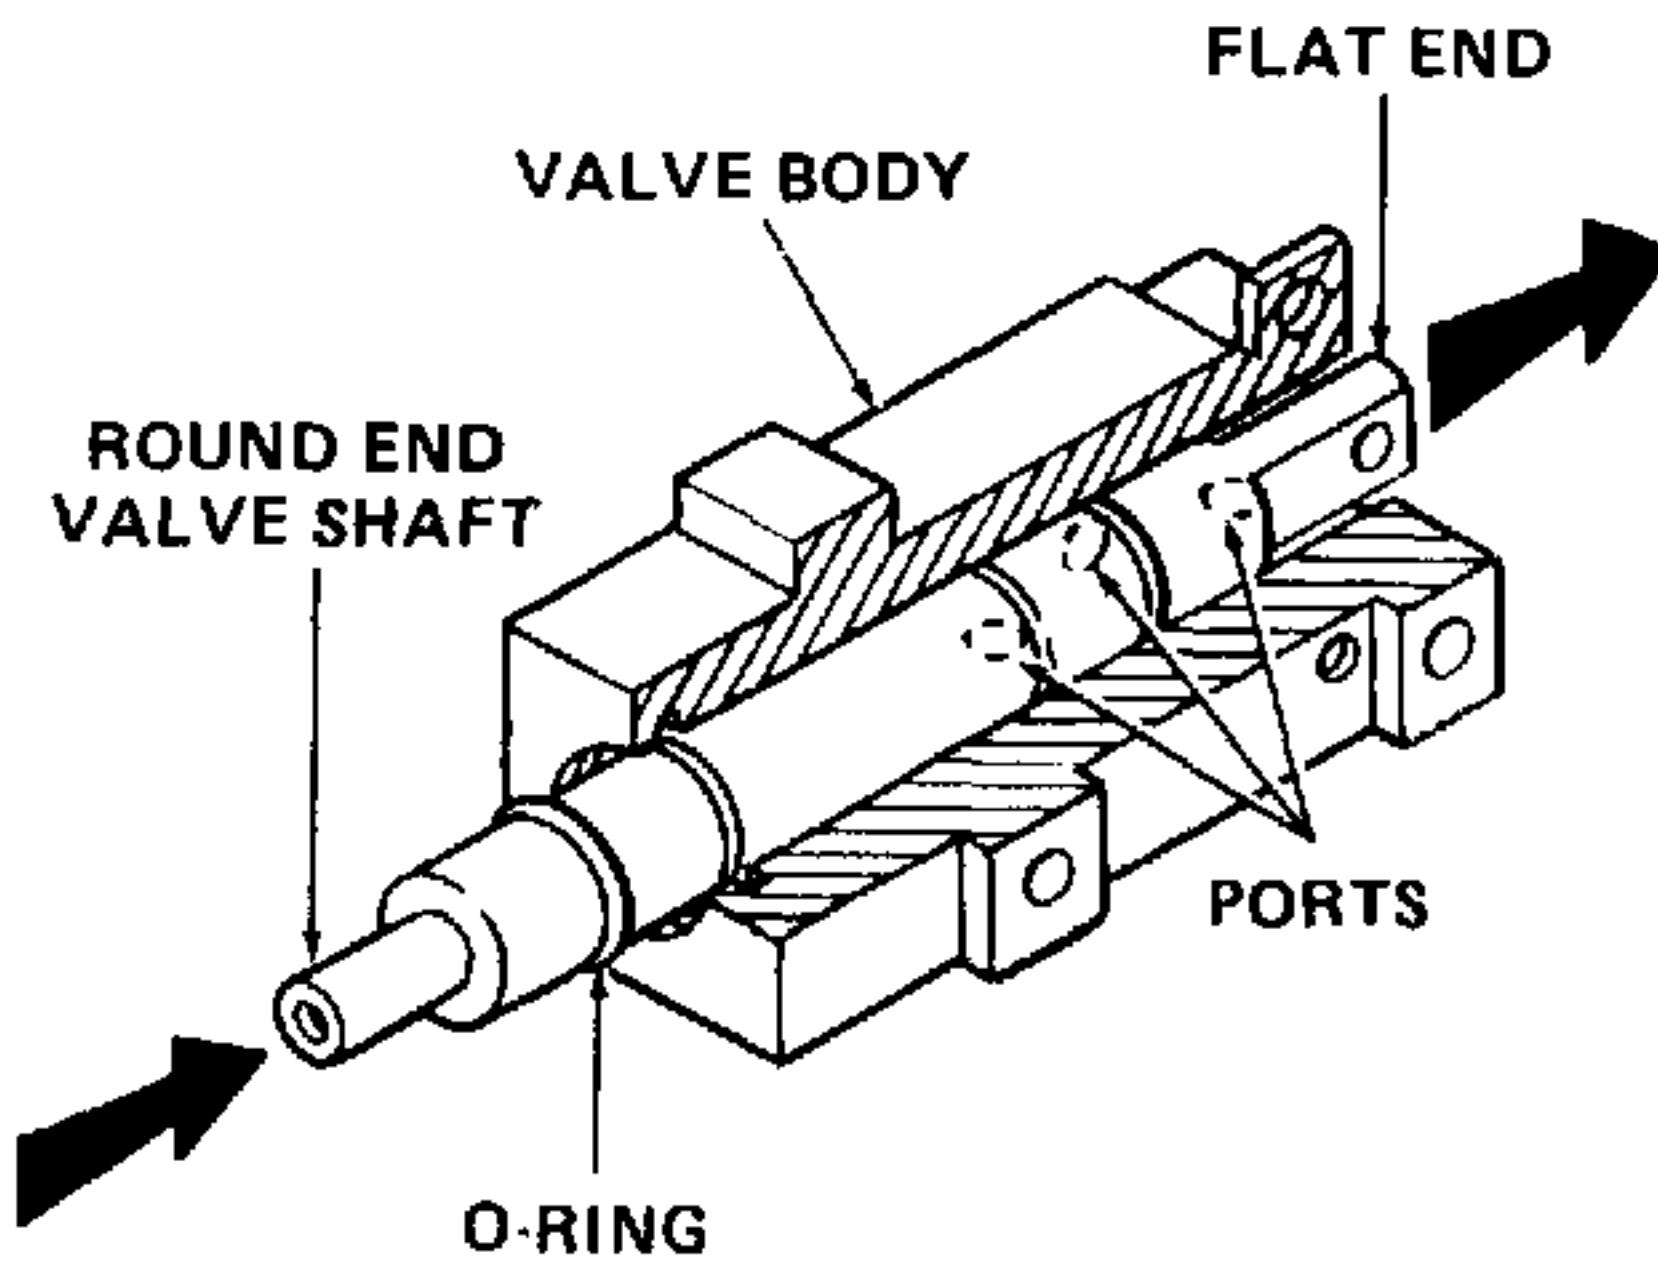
A. Installing Valve Shaft Into Valve Body.
